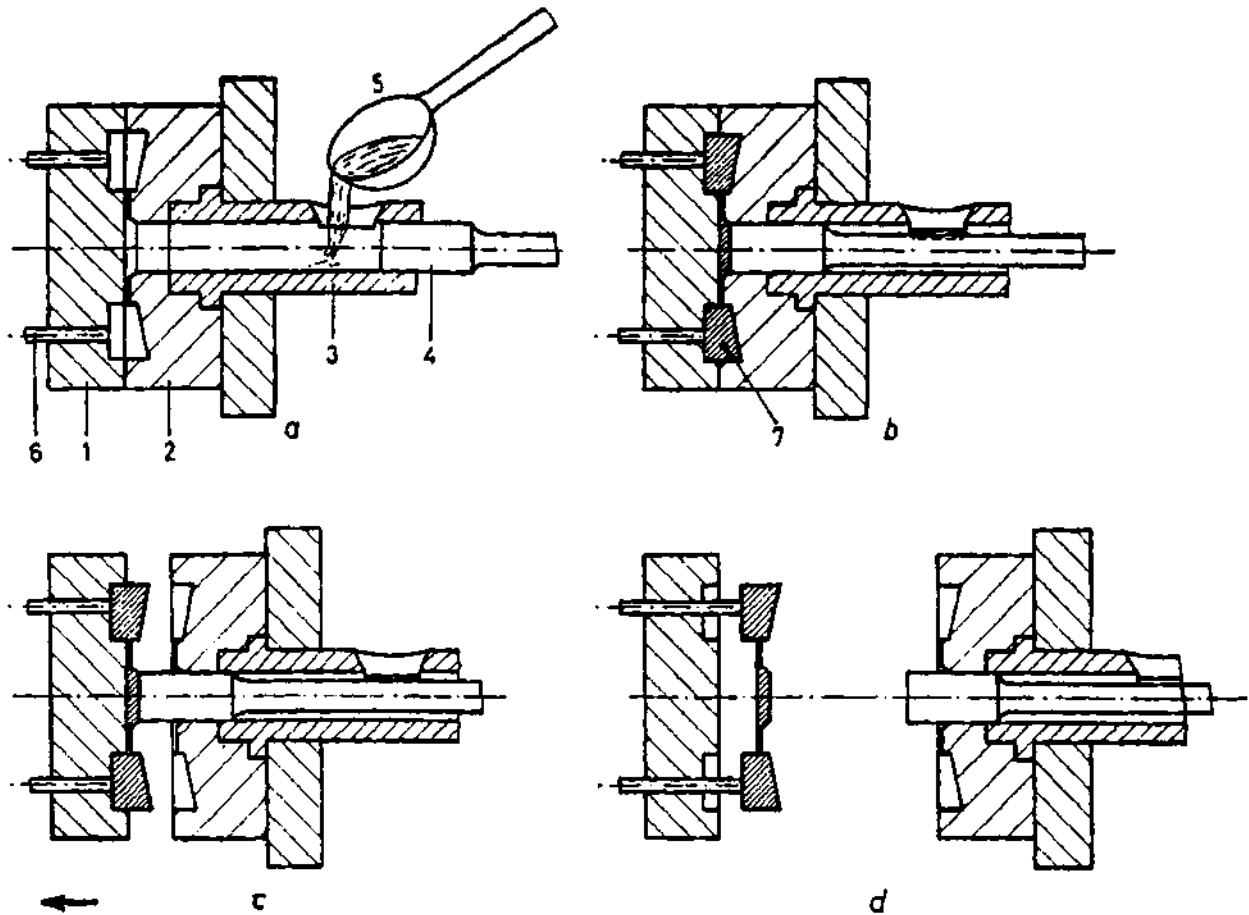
F2 Cold-chamber die casting. a) The mold is closed and molten metal is ladled into the injection cylinder ("cold chamber"). b) The plunger advances, forcing molten metal into the die cavity. c) The mold opens. d) The casting is ejected. Machine components: 1 - stationary die half, 2 - movable die half, 3) cold chamber, 4 - plunger, 5 - ladle, 6 - ejector pin, 7 - die casting. (from Davidson, Handbook of Precision Engineering, McGraw-Hill, New York)
